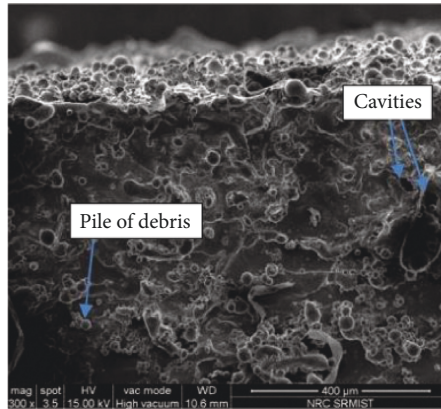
Machined surface using heat-treated brass tool with 300x magnification.
